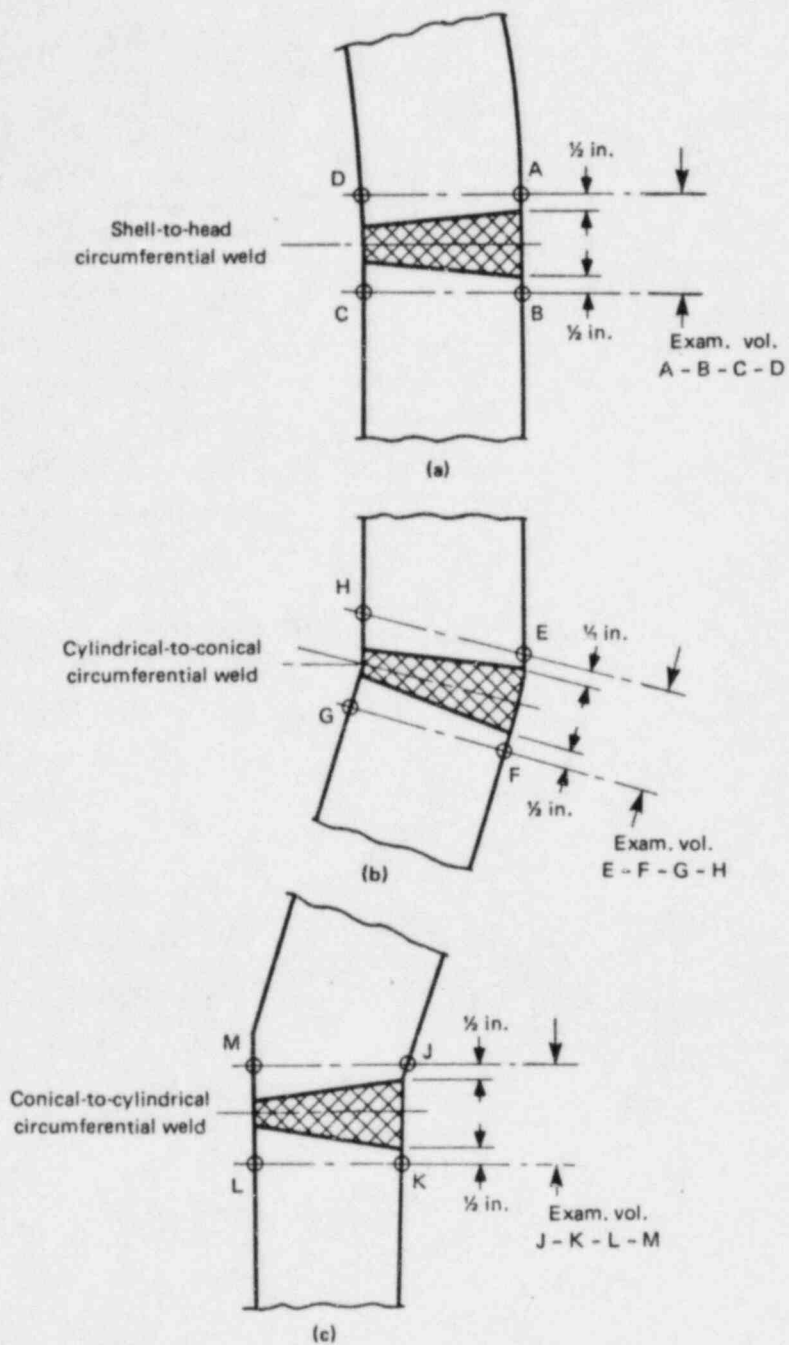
VESSEL CIRCUMFERENTIAL WELDS
